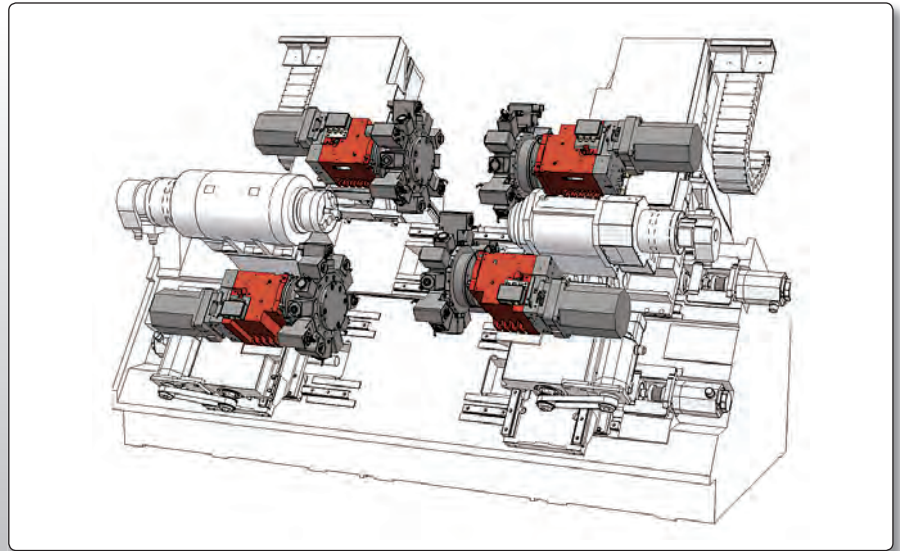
Application of disk turrets to the machine [Sauter]
